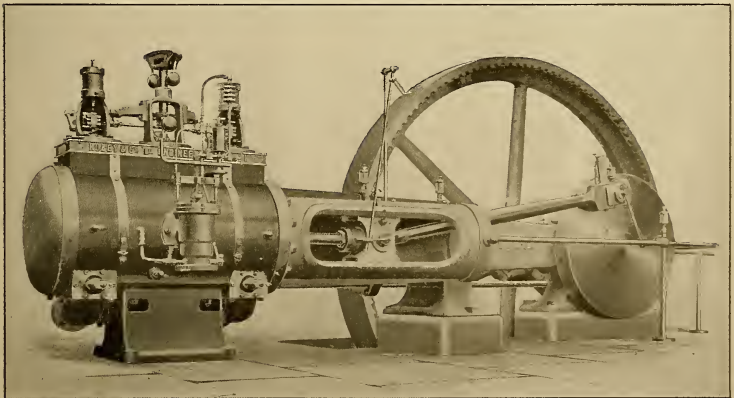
A TRUNK GIRDER FRAME, EXAMPLE OF SINGLE-CYLINDER ENGINE BUILT BY MESSRS. ROBEY & CO., LTD., LINCOLN
